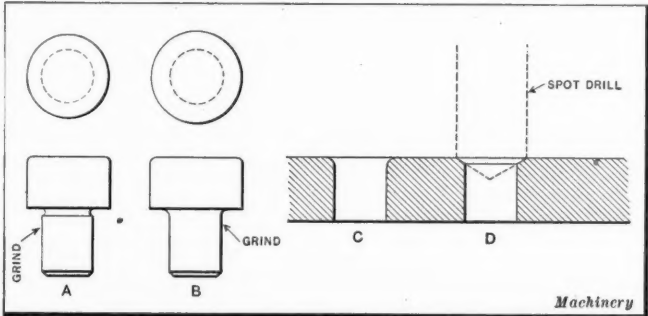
Method of finishing Jig Feet and Holes to avoid Development of Crack while hardening
